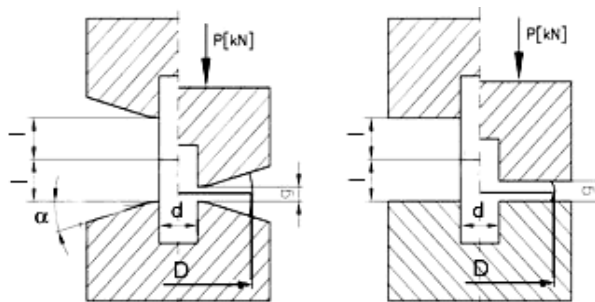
A diagram of butt cold pressure welding of rods by the method of upsetting with conical and flat dies; angle α can be positive or negative
